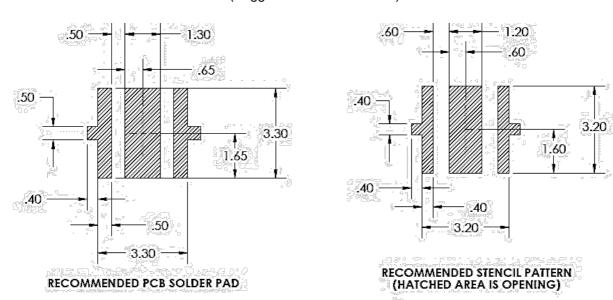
INV-Q39CTSIR Recommended Solder Pattern
